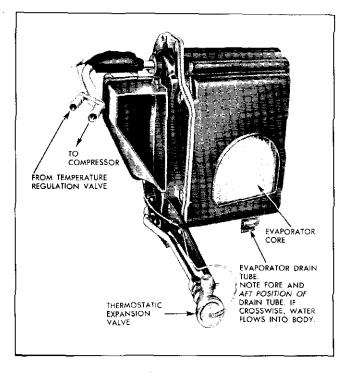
Evaporator Assembly (With Thermostatic Expansion Valve)
